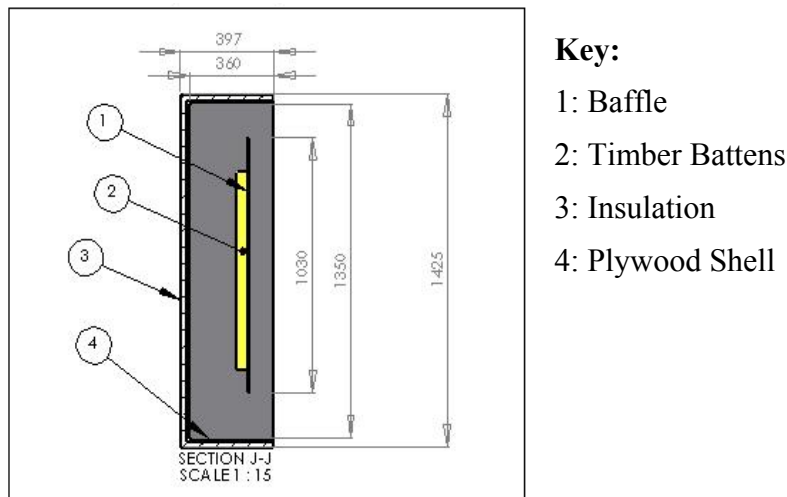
Section View through Metering Box (Dimensions: mm)
